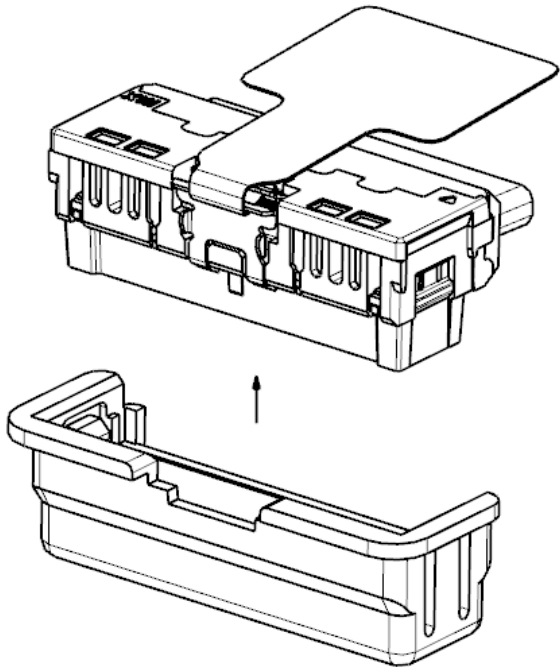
Free-Side Connector & Dust Cover Assembly Direction
